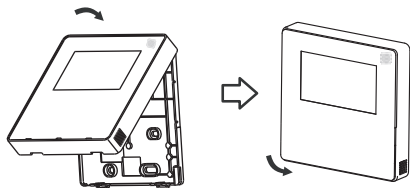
Reattaching the Front Cover of the Wired Controller
